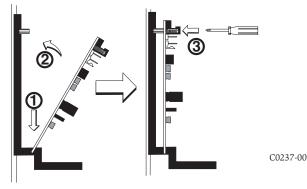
MOUNTING THE CHS-6 CHASSIS:
